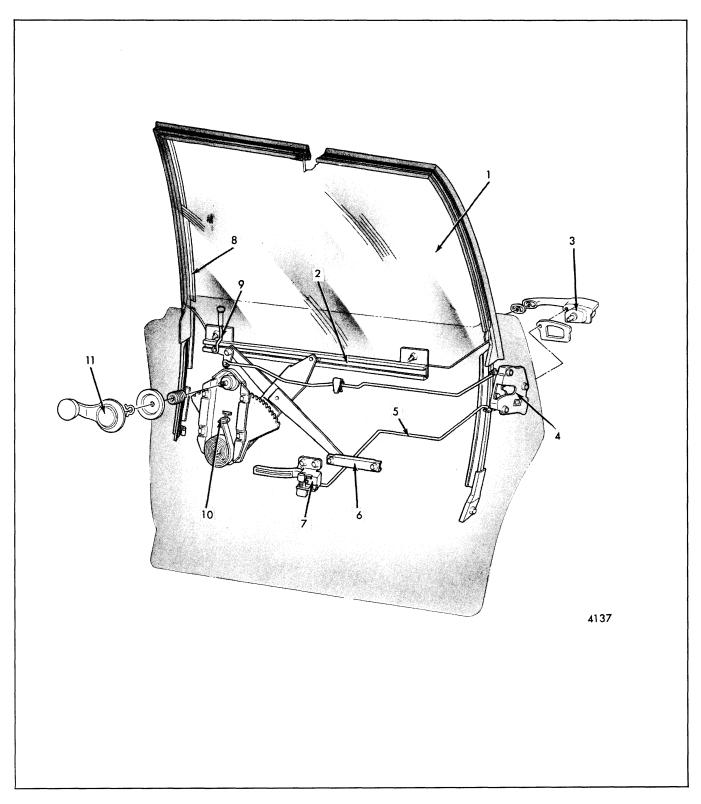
Rear Door Hardware - "B" Closed Styles
